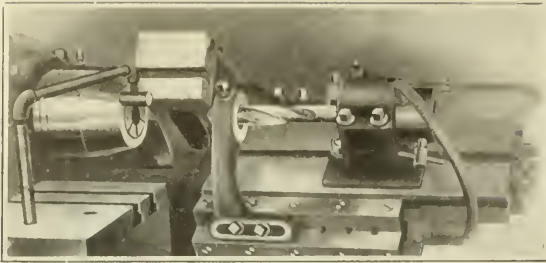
Standard Type of Drill-holder and Drill-support in Operation
